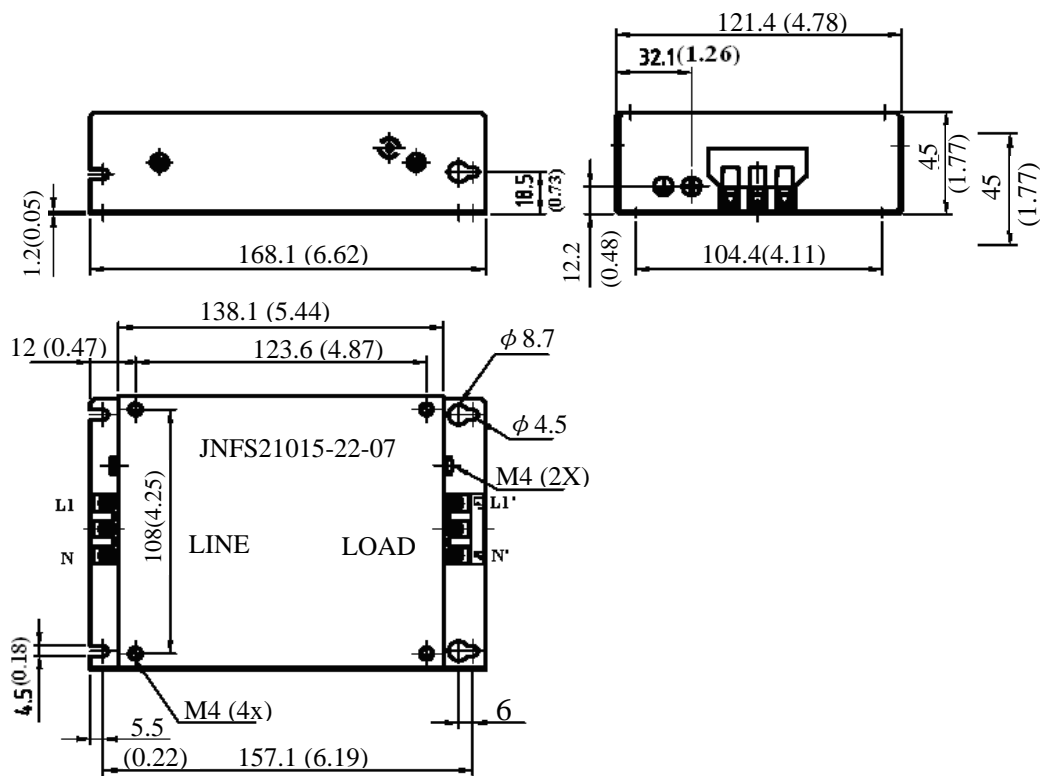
External Filter Dimensions JNFS21015-22-07
